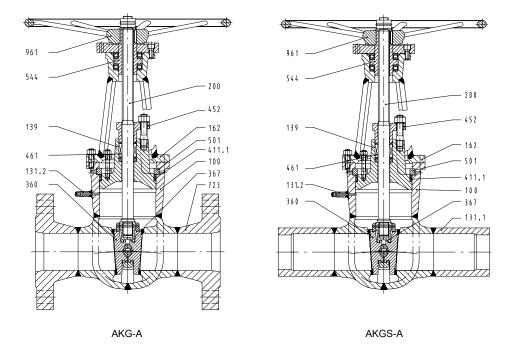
Sectional drawings of AKG-A/AKGS-A
